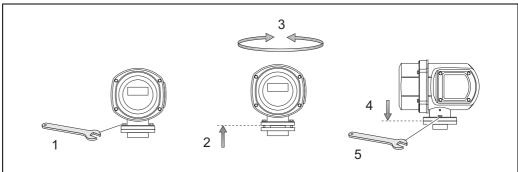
Turning the transmitter housing (stainless-steel field housing)
